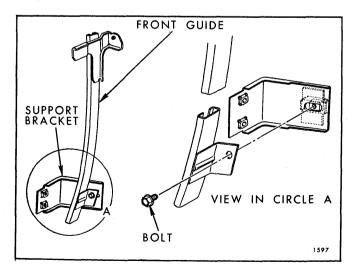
Front Guide to Support Bracket Attachment – 68069–68169 Styles
